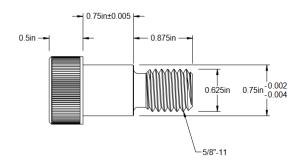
5/8" - 11 bolt used for all major structural bolted connections (Drawing provided by McMaster Carr)
